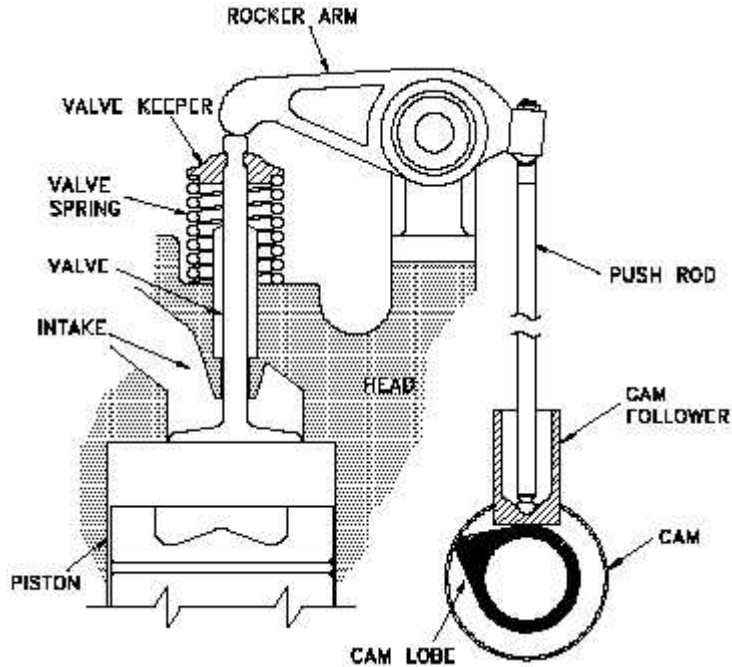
Diesel Engine Valve Train Schematic (not drawn to scale)
